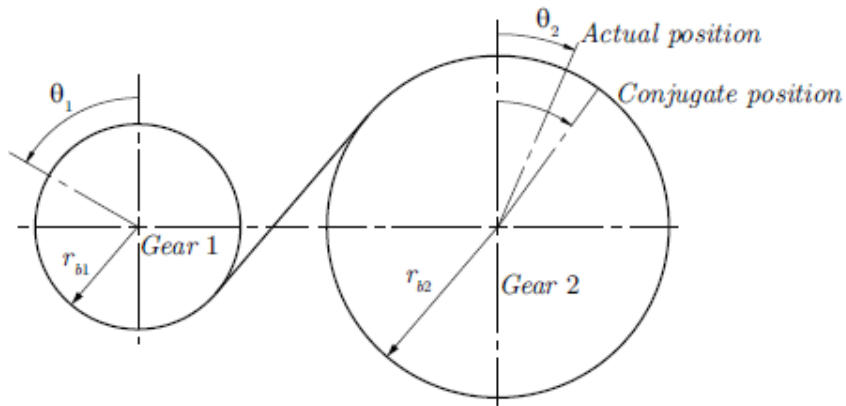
3: Actual and conjugate positions of gear 1 and gear 2 [8].
